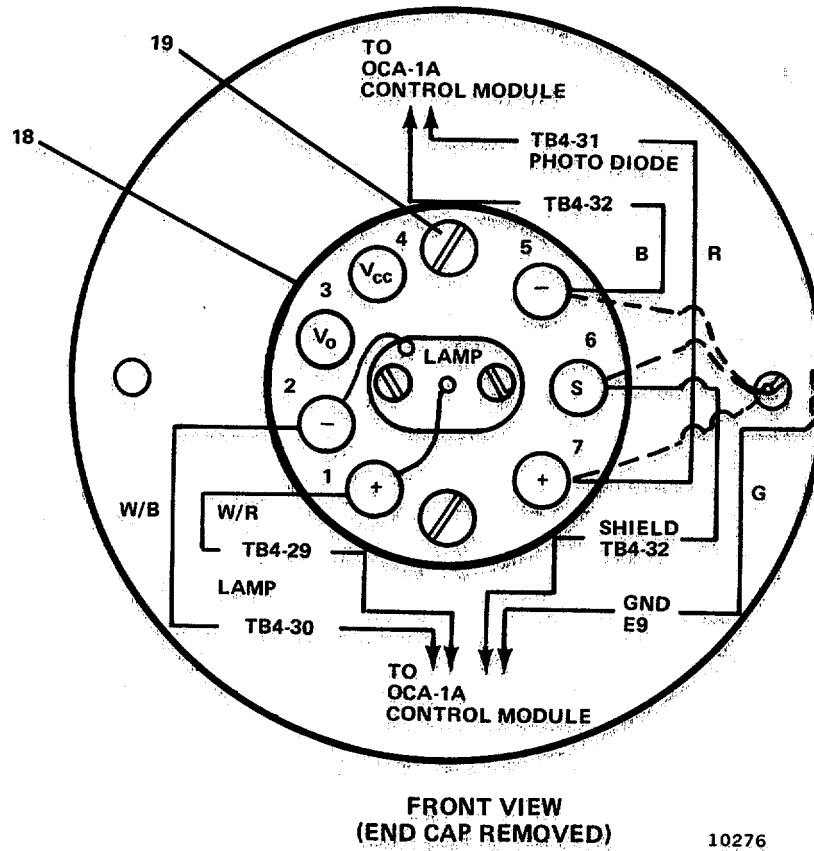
Sensing Module Subassembly (Sheet 2 of 2).
